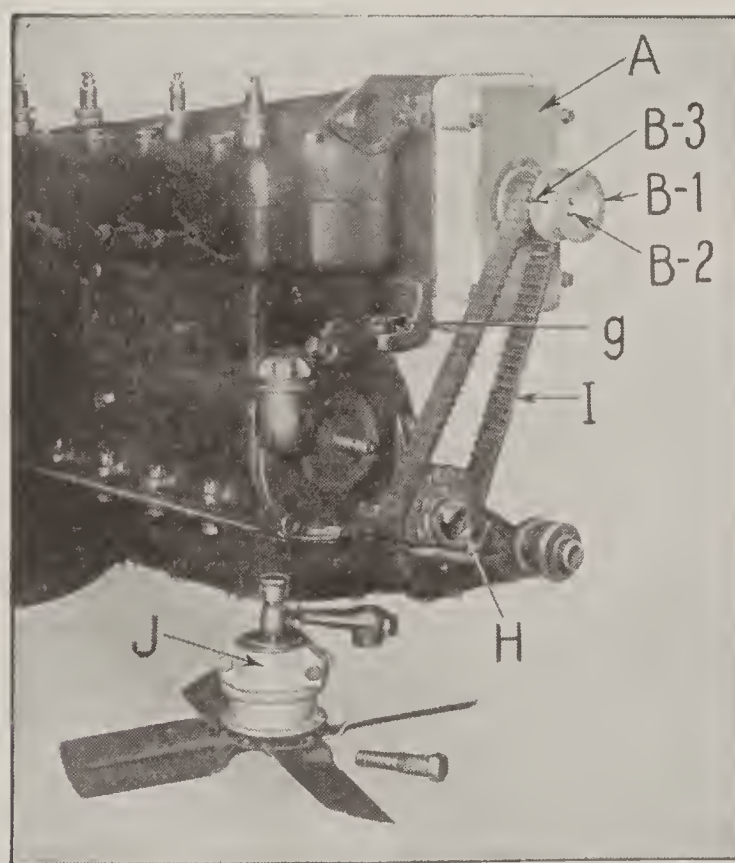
Tightening Mounting Bracket with Shaft Pulley in Plates
